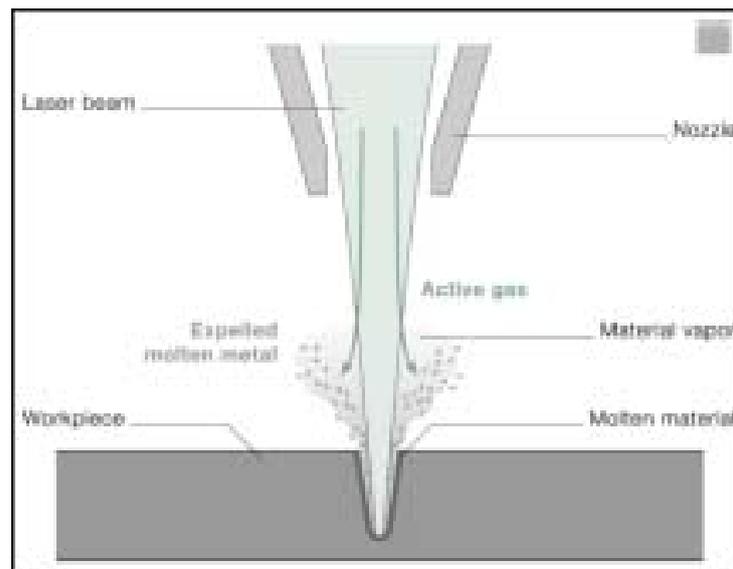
The laser drilling operation; the laser melts and vaporizes the material. The vapour pressure expels the molten material out from the hole.
